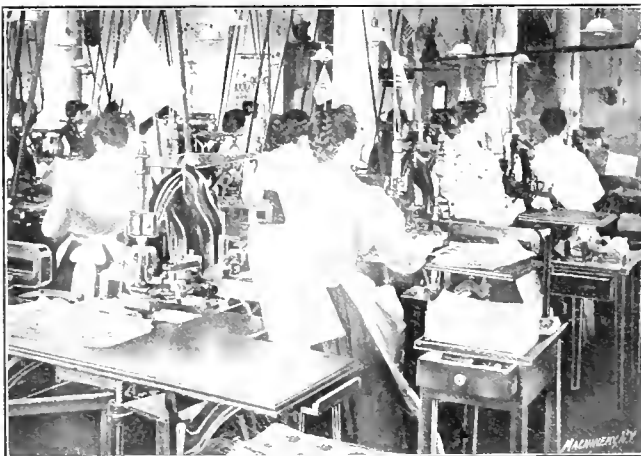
Numbering Bills at the Bureau of Engraving and Printing
